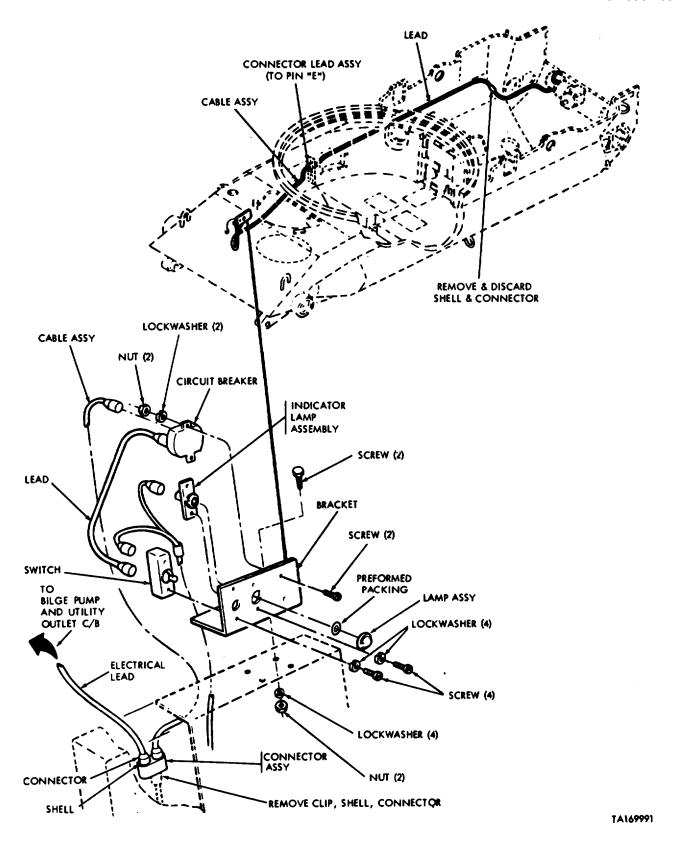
Removal or Installation of electrical system components (sheet 1 of 2) (M60 only).
